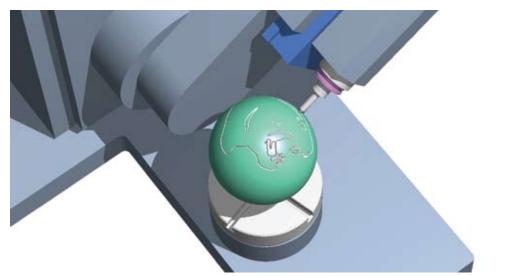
Set-up on a 2-axis machine for engraving a bowling ball.
